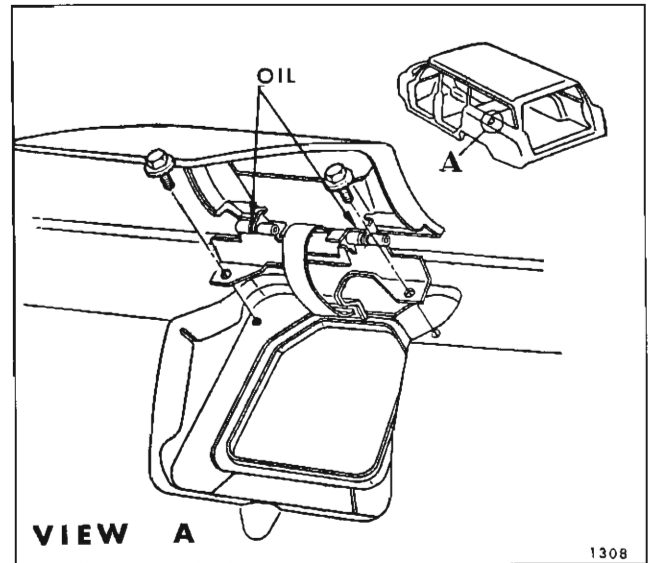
B8—Gas Tank Filler Door - Station Wagons
